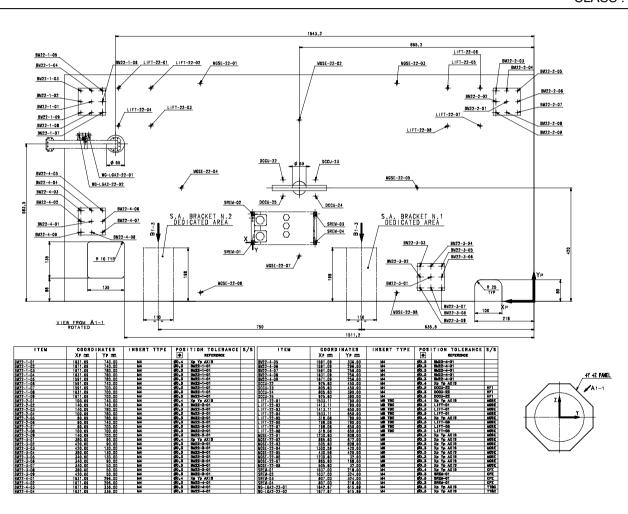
Planck +Y+Z Lateral Panel.(outside of the SVM).
